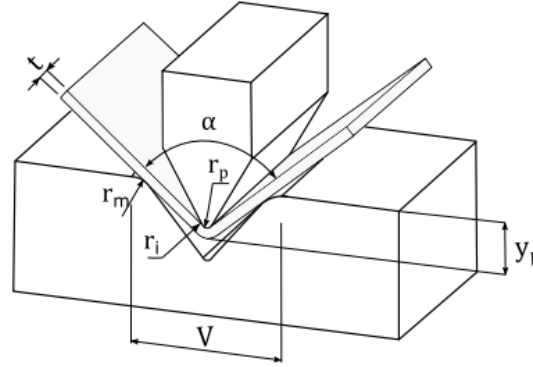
Experimental setup: sheet bending angle (α), sheet thickness (t), punch penetration (y_p), die opening (V), punch radius (r_p), die radius (r_m), inside bending radius (r_i).
